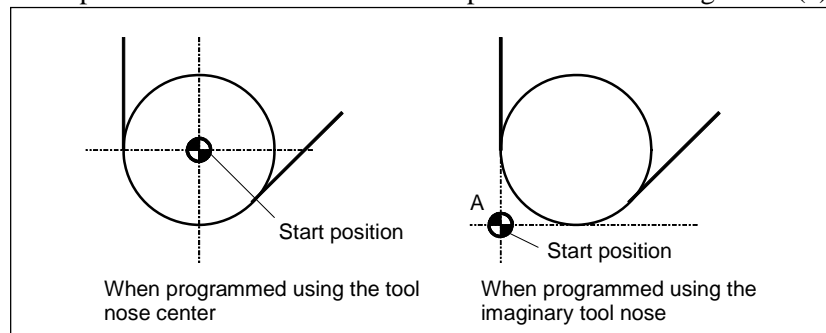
(a) Tool nose radius center and imaginary tool nose
